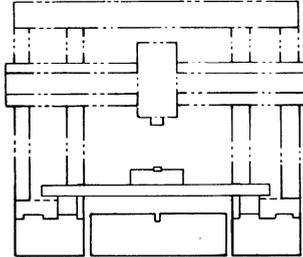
Type 3: Machine with two milling heads on a movable cross-rail
